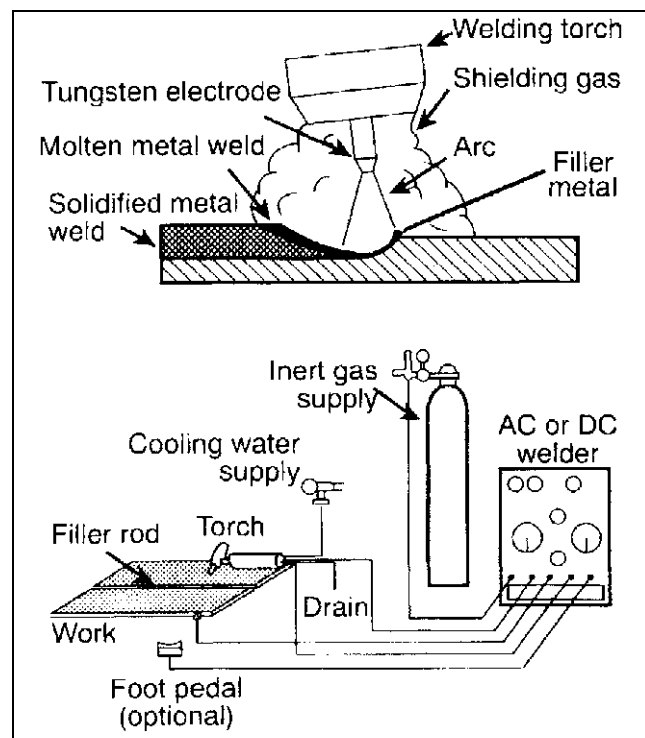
The Gas Tungsten Arc Weld (GTAW) process
